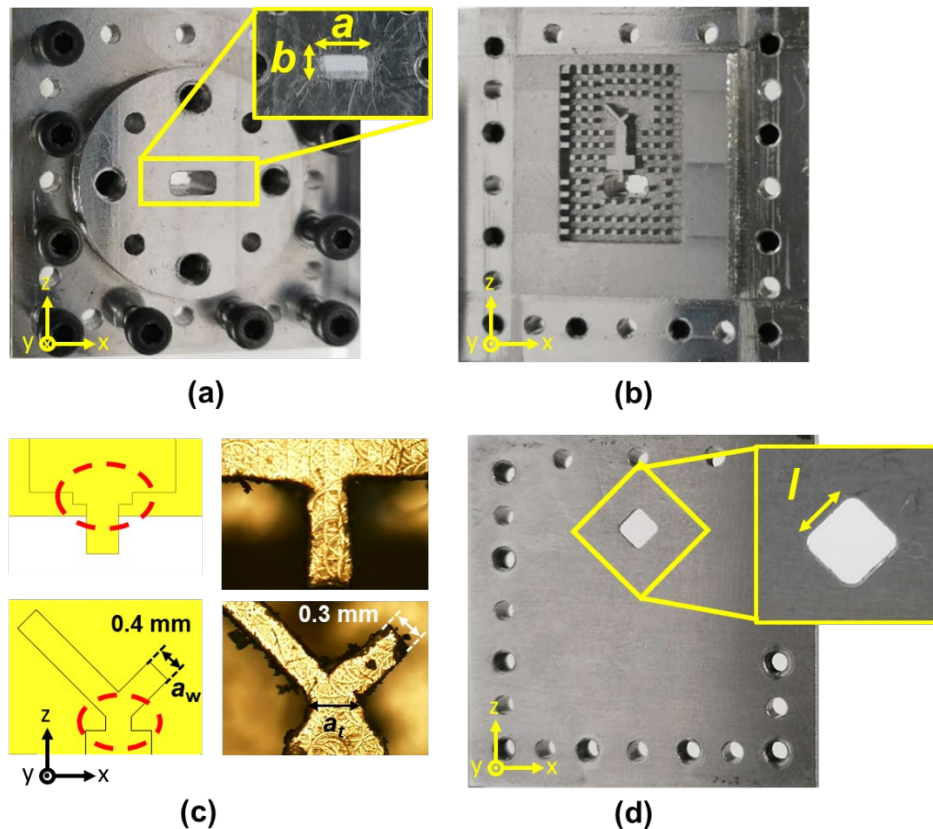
Photographs showing a view of (a) bottom WR-15 waveguide flange where $a = 3.18$ mm and $b = 1.90$ mm (b) Feeding system. (c) Design (left) and manufactured prototype (right) where fabrication is highlighted (the images are not in the same scale) (d) D antenna top view showing the length of the slot ($l = 2.65$ mm).
